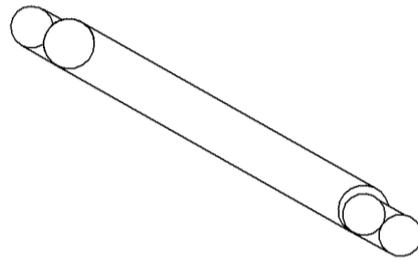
Isometric view and fabricated part of the eccentric shaft
